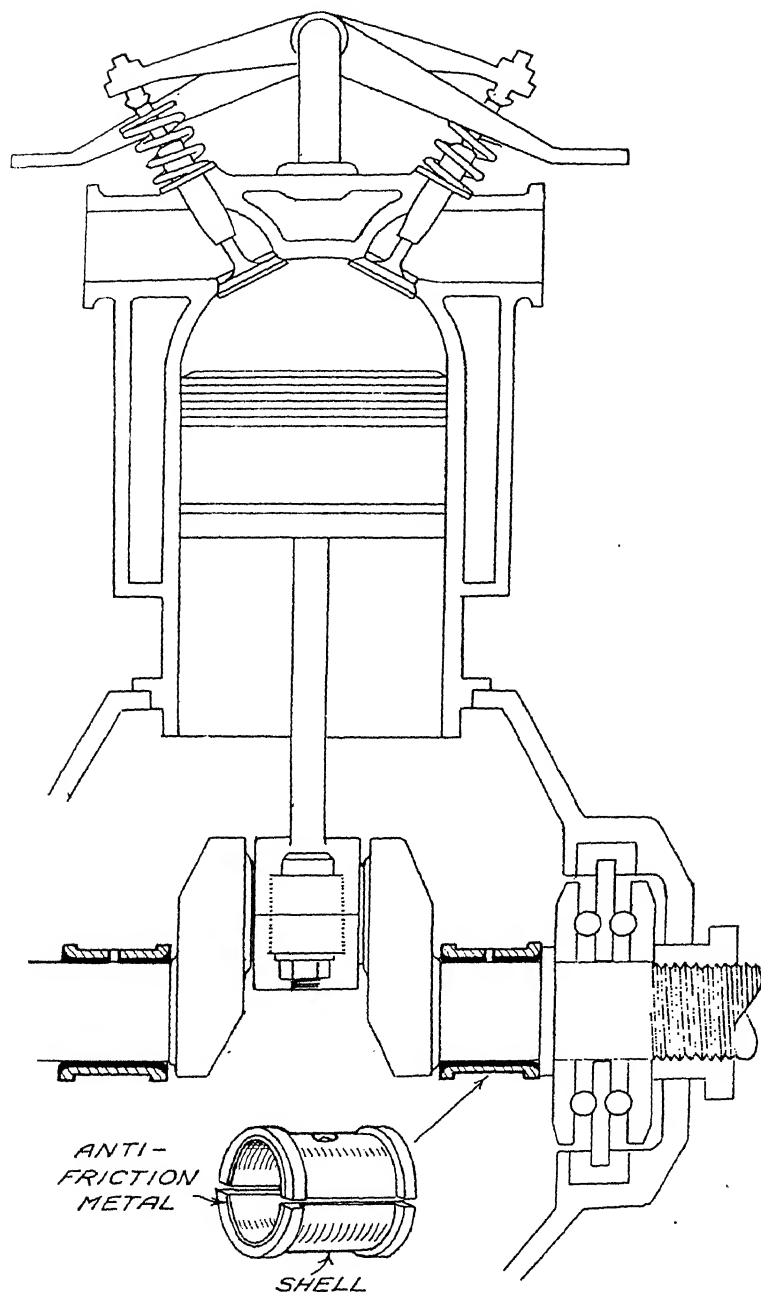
A.—CYLINDER ASSEMBLY SHOWING BEARINGS.
